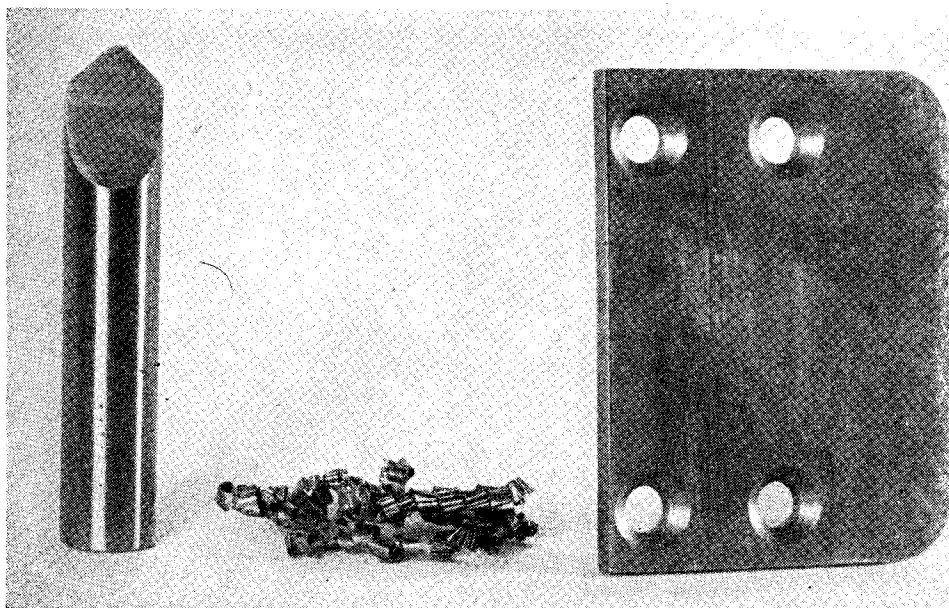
The D-form countersink cuts a coiled chip and forms a well-finished hole
